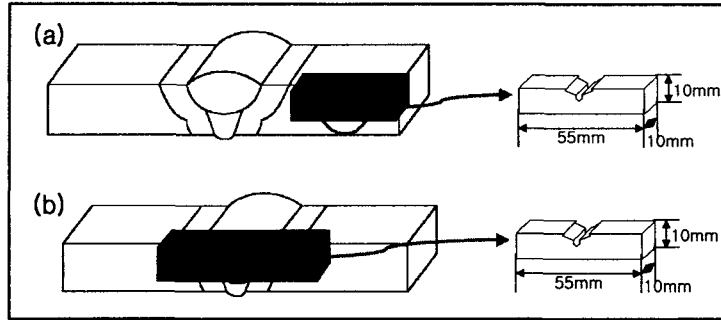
CTOD test specimen of (a) base metal and (b) weld metal
